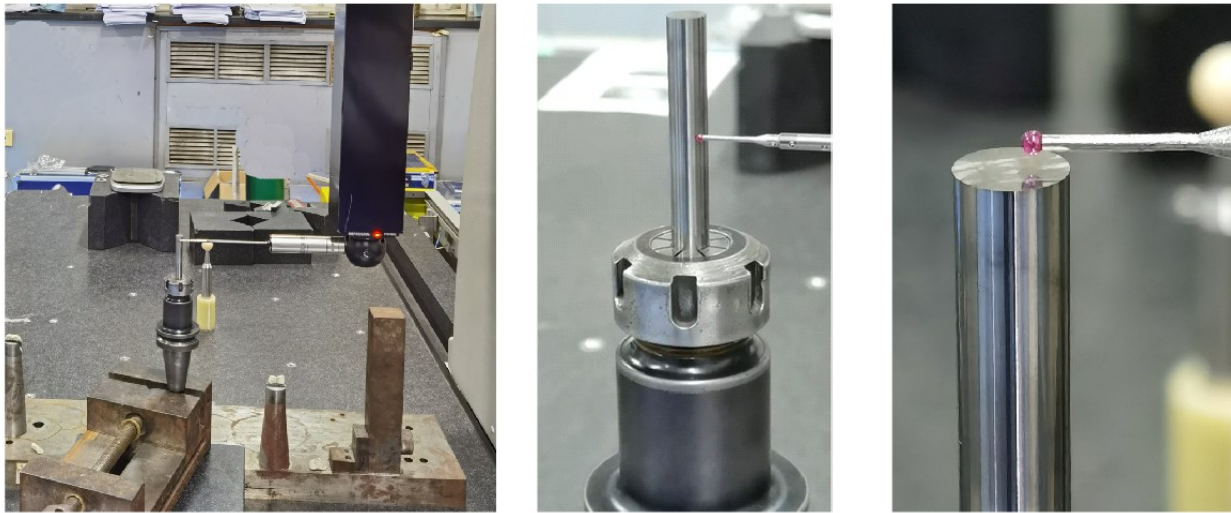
Gauging the geometries of the end measuring rod with a coordinate measurement machine.
